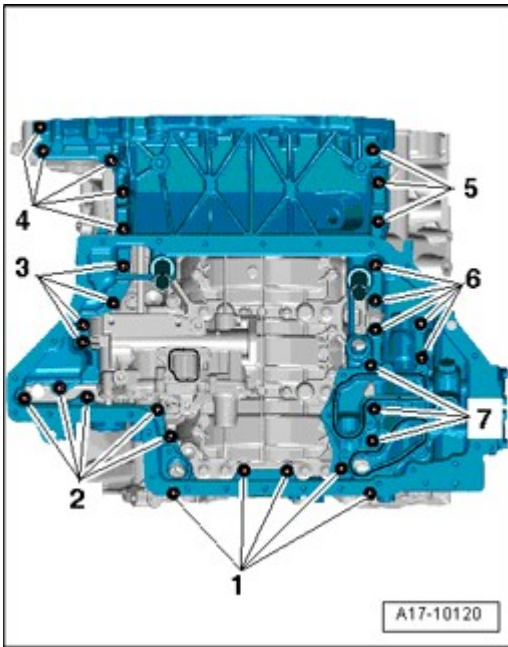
Removing/Installing Bolts For/To Upper Section Of Oil Pan
